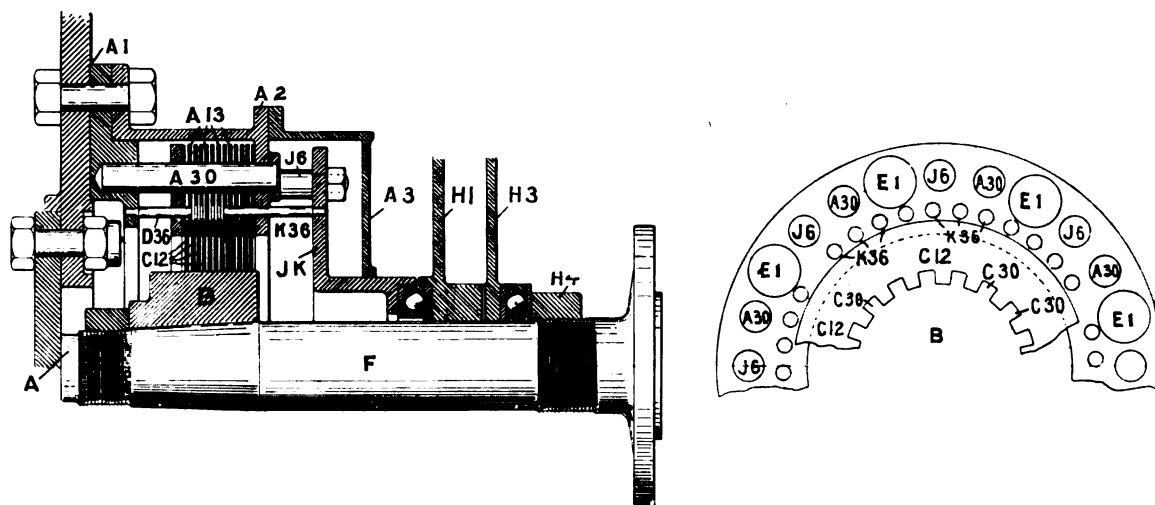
Longitudinal vertical section, showing another form of the Bradley Multiple-Disc Clutch, in which the overall dimensions, and the weight of the inner member, have been considerably reduced. To the right, are part sections of the Discs.
